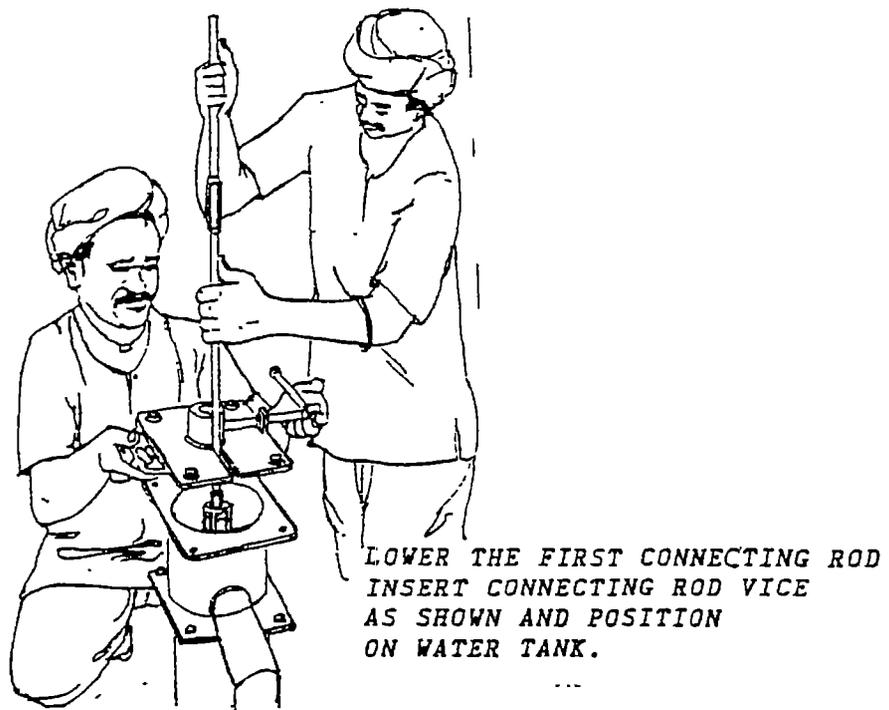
INSERT LOWER END OF THE CONNECTING ROD IN THE RISER PIPE.
